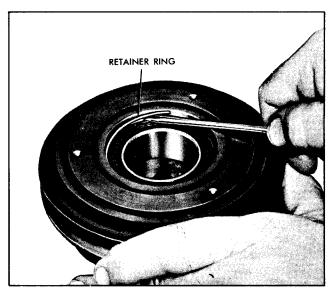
A-67 Removing Pulley Bearing Retainer Ring
